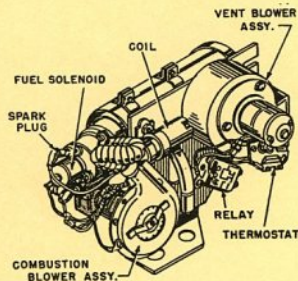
SKETCH OF TRANSPORTER HEATER
